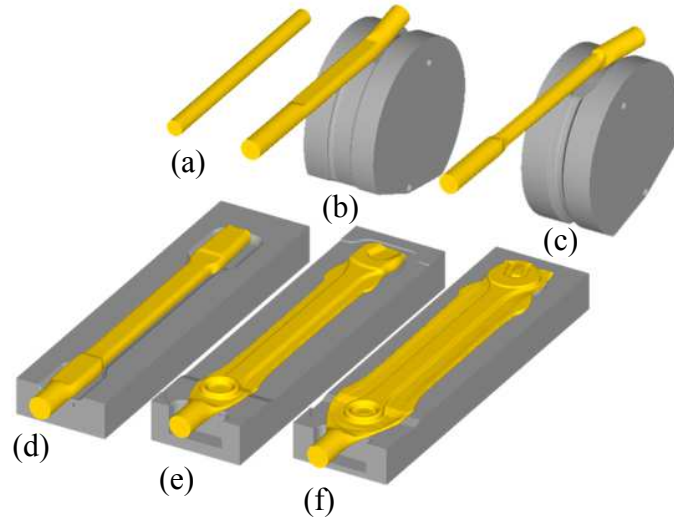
Simulation workpiece model results at the end of each operation, for the final wrench forging process. (a) Starting billet and (b) Roll forming – 1st pass, (c) Roll forming – 2nd pass, (d) Edger (e) Blocker (f) Finisher operation
